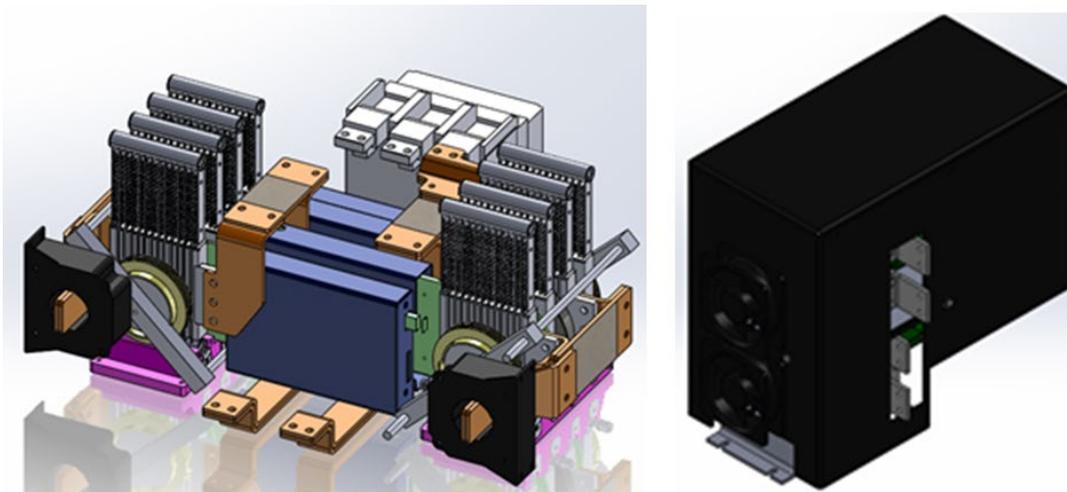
[Left] Mechanical design of SS DCCB B1; [Right] Mechanical design of power stack for unidirectional SS DCCB B2
